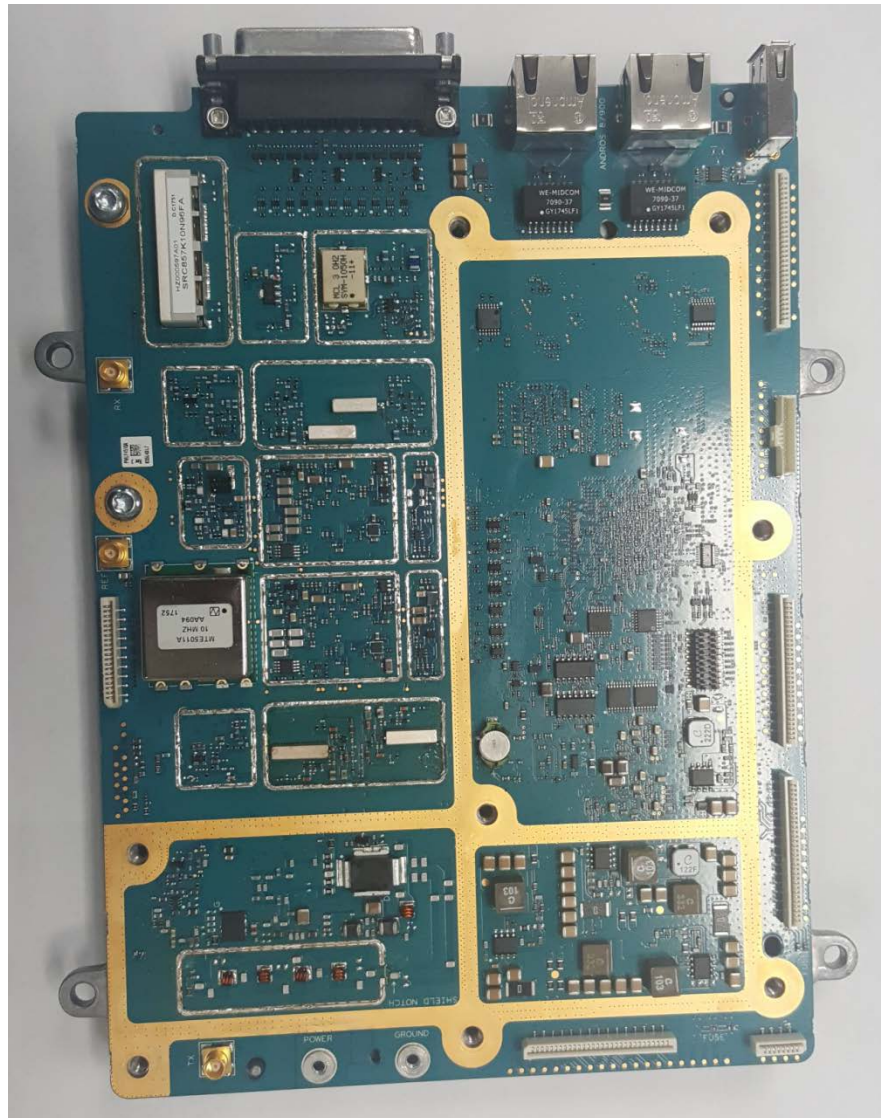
C – Internal Front View – Modem Module Bottom View, Heat Sink and Shields Removed
